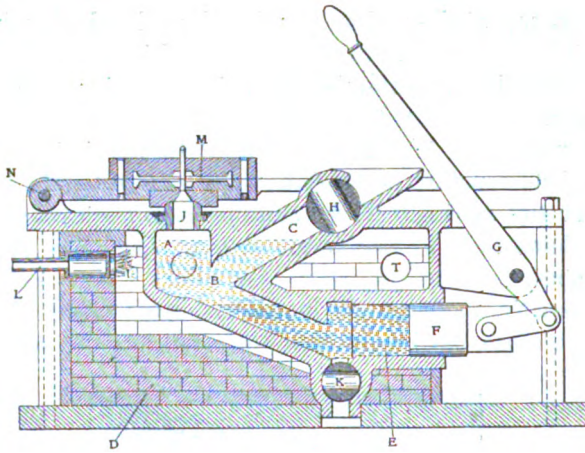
MOLDING MACHINE WITH MOLD LYING FLAT ON TOP
